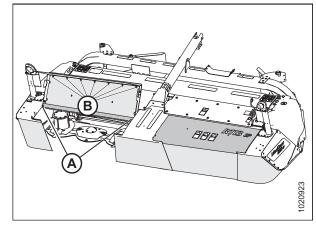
Right Cutterbar Door in Open Position – R113 SP Shown, R116 SP Similar
